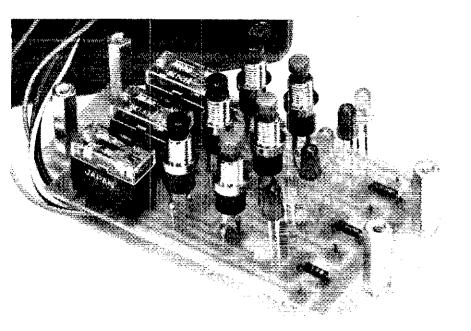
The completed PC board mounts to the control-box top by means of no. 4-40 screws and ¾-inch threaded spacers. The corners of the circuit board must be removed to clear the mounting posts for the control-box top.
